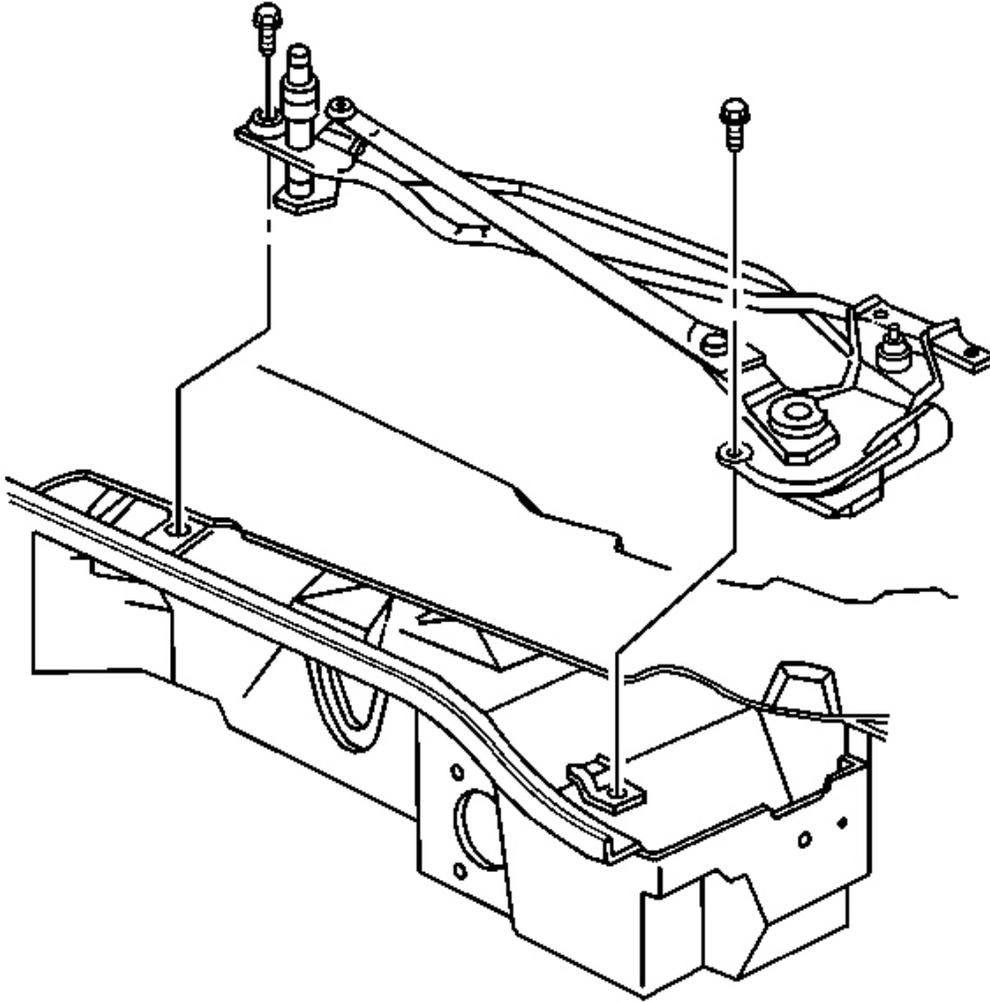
Wiper Drive System Module To Wiper Motor Electrical Connector
